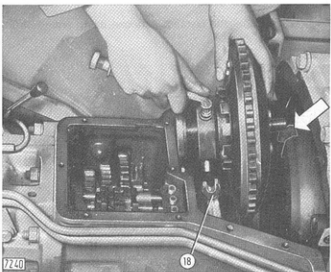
Removing (or Refitting) the Single Plate Clutch Assembly
